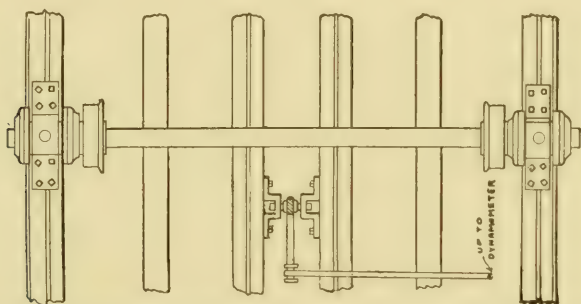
Sketch Showing General Method of Mounting Chapman Double-Ball Bearings. This Sketch Also Shows General Arrangement of the Car Body Dynamometer Lever.
